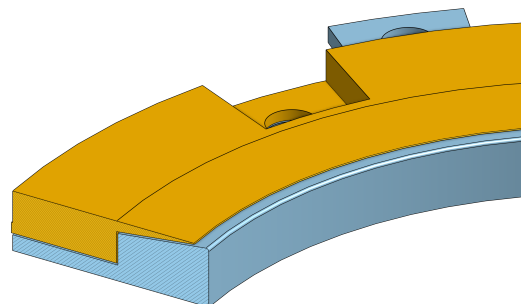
Cross-sectional view of the clamping rings for Gen 4, showing angled clamping.
